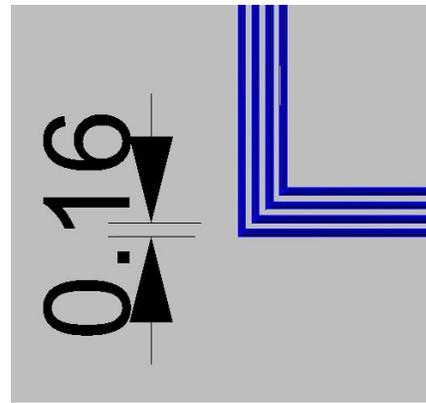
Detailed geometry of bucking coil as it would be on a printed circuit board. Each board would have 4 turns on each side.
